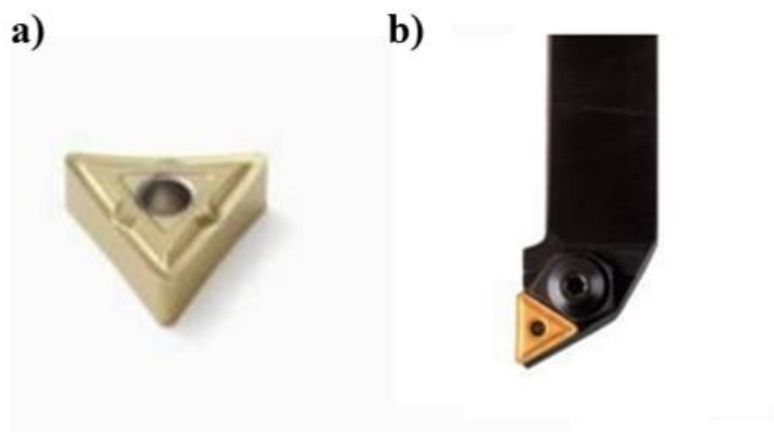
Cutting tool: a) Insert: TNMG160408-MF1 CP500, and b) Tool holder: PTGNL2020K16.
